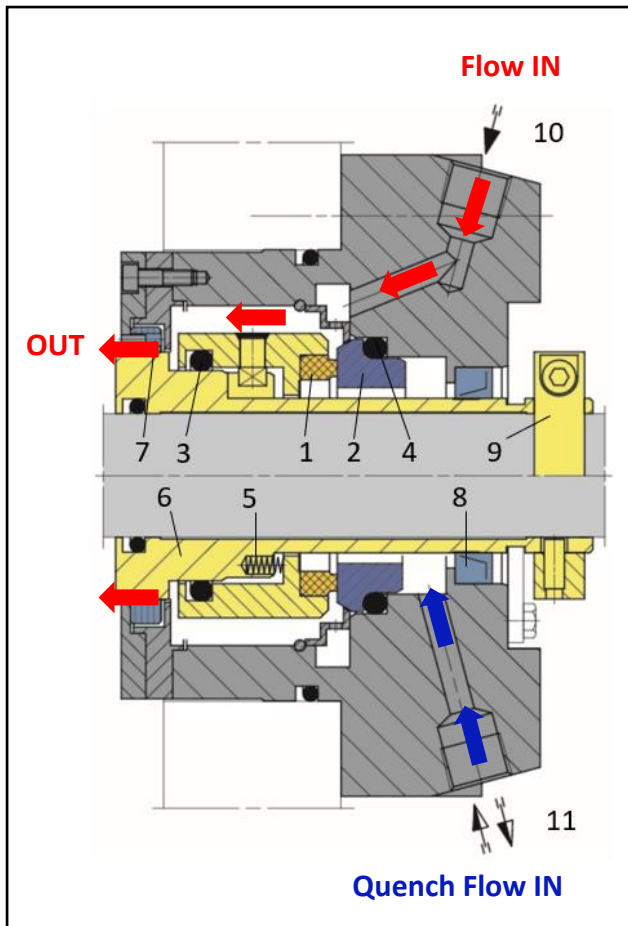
Component mechanical seal, directly assembled on a pump shaft, red arrows show the pumped media and leakage path
